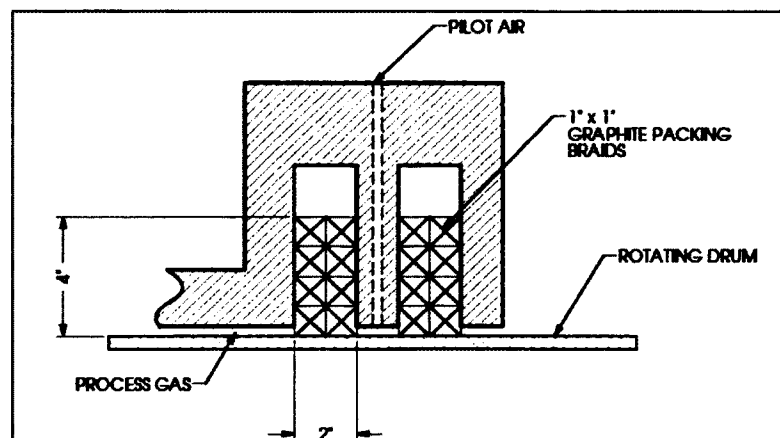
Full Scale Application Proposed Seal Arrangement.
